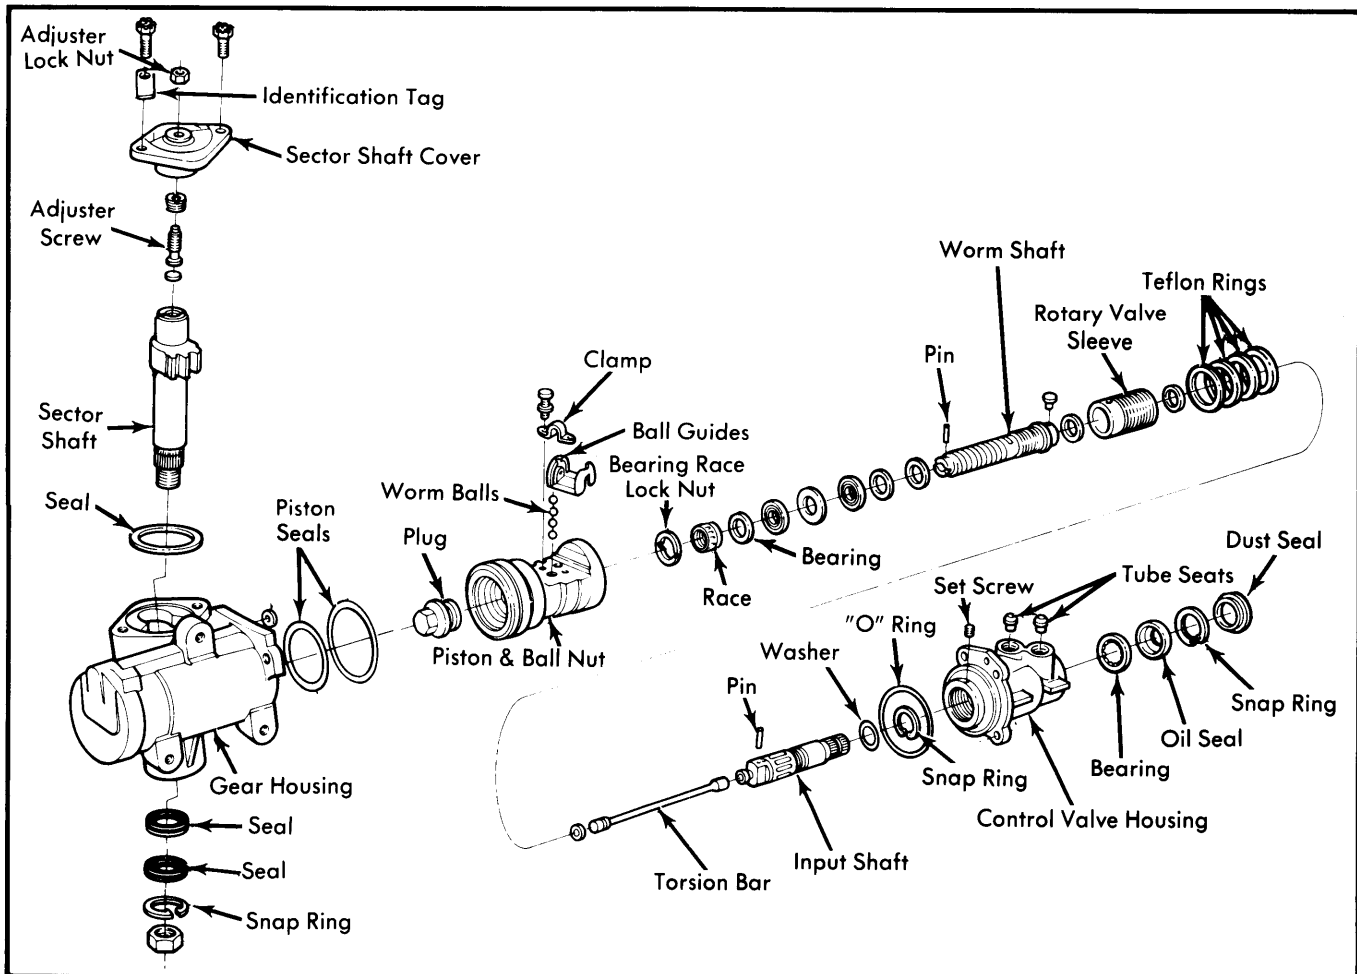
Exploded View of Ford Motor Co. Integral Power Steering Gear. Input Shaft is Connected to Worm Shaft Through a Torsion Bar. The Torsion Bar is Designed to Flex Under Heavy Steering Load. Flexing Causes the Alignment of the Input Shaft and the Rotary Valve Sleeve to Change. This Change Actuates the Power Assist.
